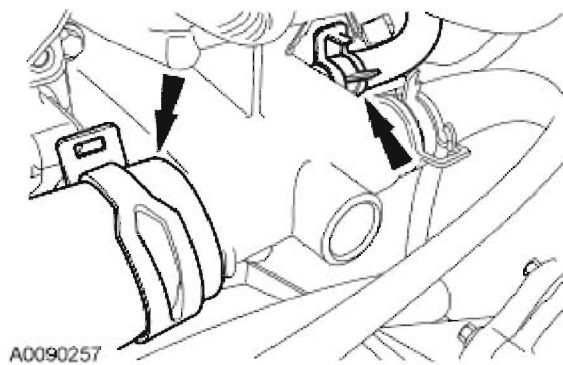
Locating Reversing Lamp Indicator Switch
